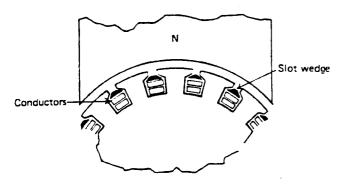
Rotor Conductor Arrangement in a Modern Machine.
